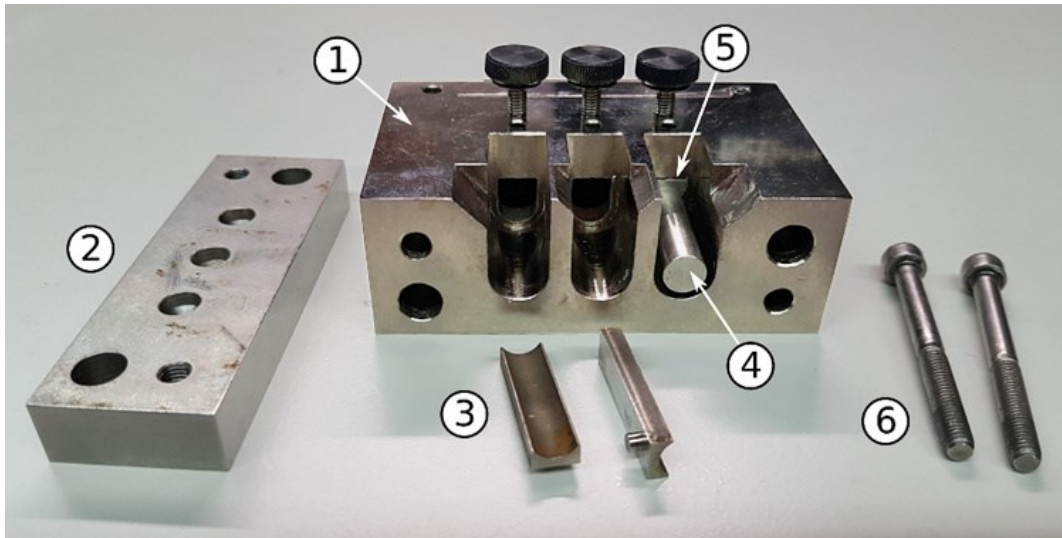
The lower support is disassembled including the following parts: (1): Main part of lower support; (2): ground plate; (3): two clamping jaws; (4): dummy cylinder replacing one sensor; (5): mounted clamping jaw; (6): screws to fix the ground plate. (The position sensors are not shown.)
